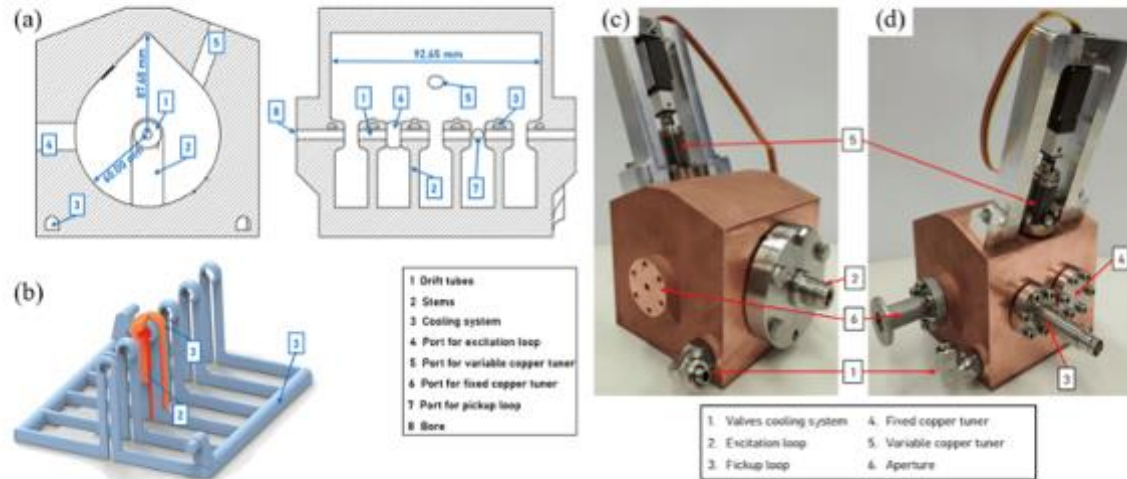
Design of (a) DTL cavity and (b) cooling system and (c) front and (d) rear view of the fully equipped prototype [154].
